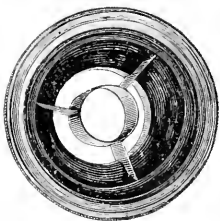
SECTION OF NOZZLE SHOWING RING.
